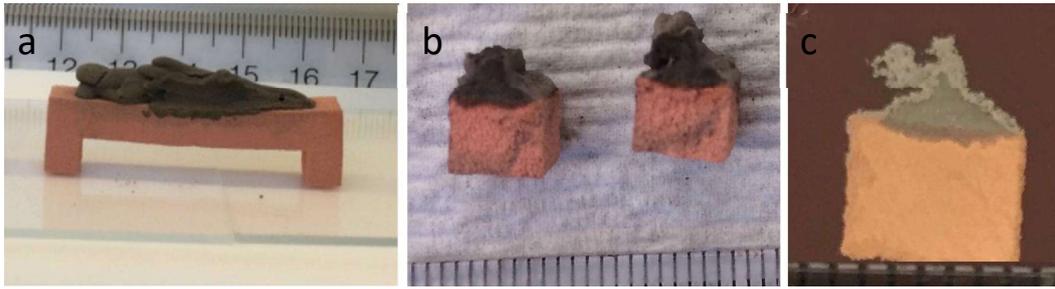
(a) A part with coating treated at 500°C, (b & c) sintered part broken surfaces showing strong bonding between the part and the coating. (Note: 1 div = 1 mm on the ruler)
